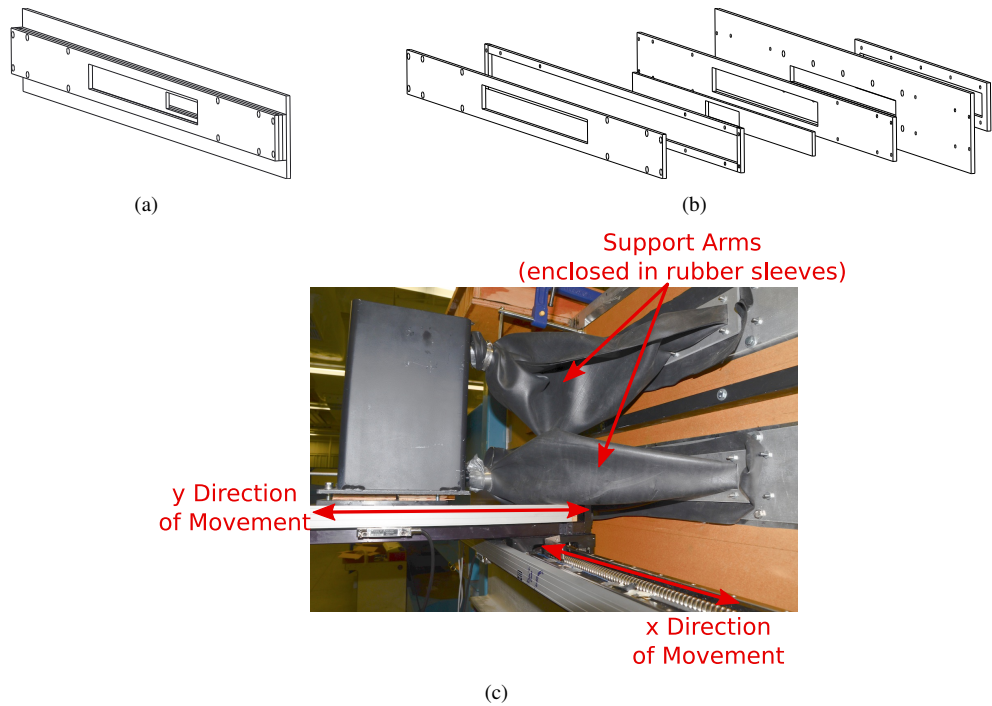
Sidewall sealing system used in split-film probe test a) assembly view, b) exploded view, and c) connection between mount and horizontal support.
